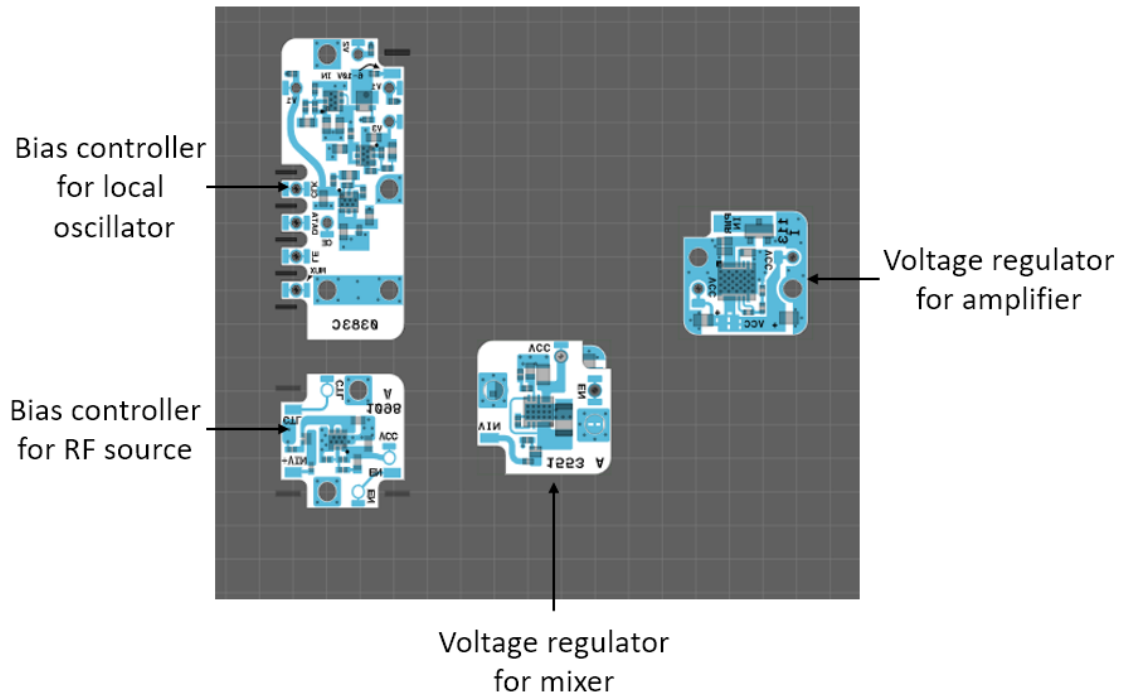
X-MW convert board bottom design on layout and cascade tool.
